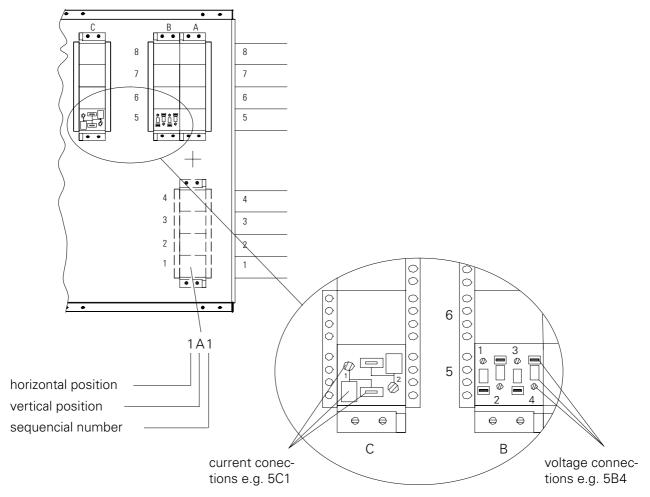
Connection plug (rear view) for flush mounted casing (example)
